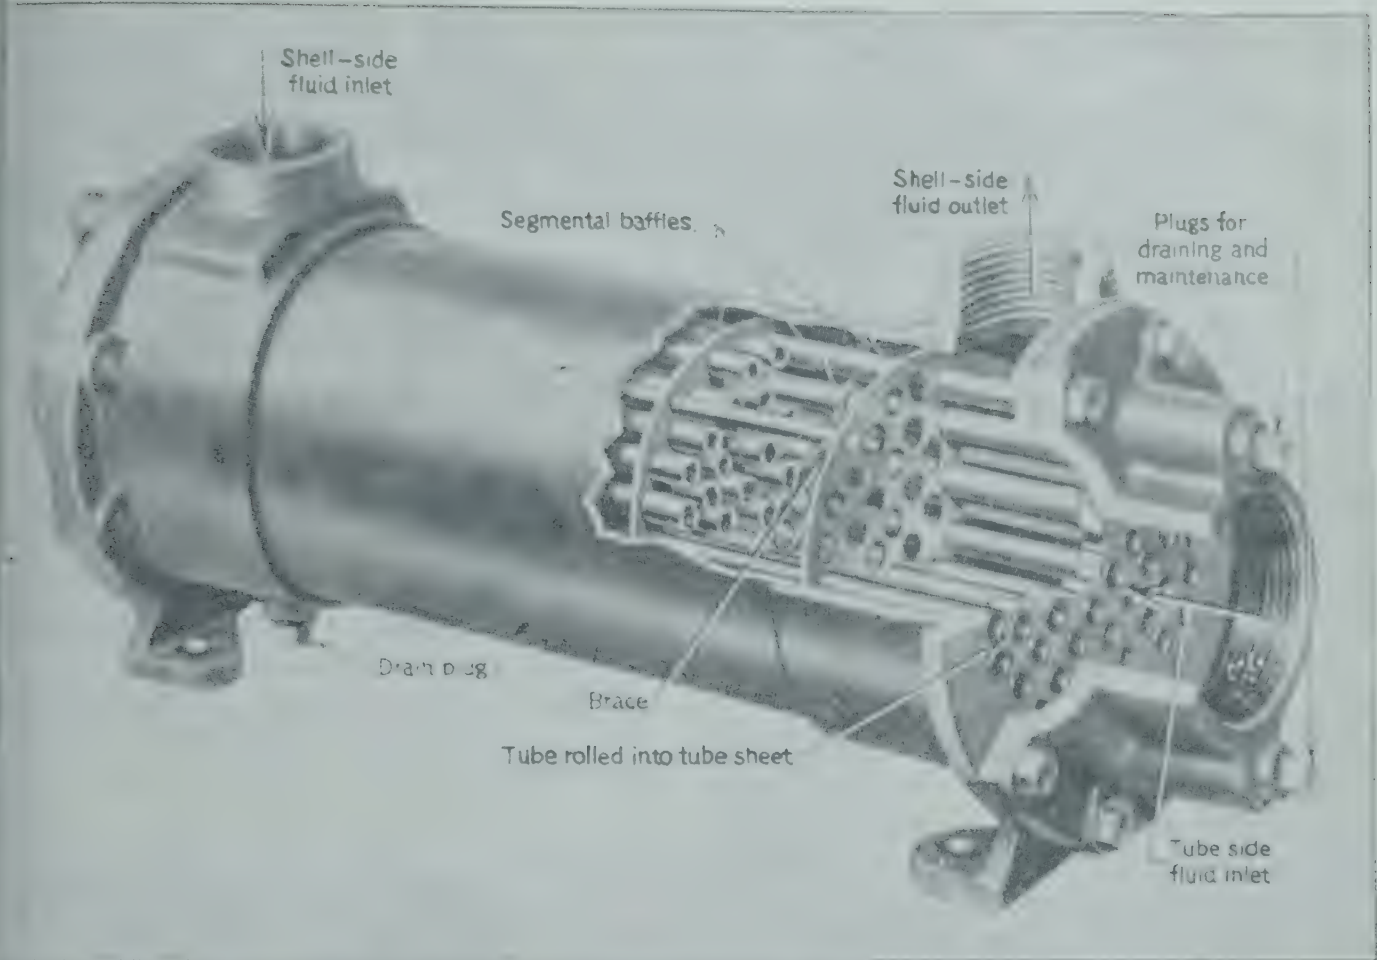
Cutaway view of a single-pass shell and tube exchanger. (Ross Heater and Mfg. Co.)
